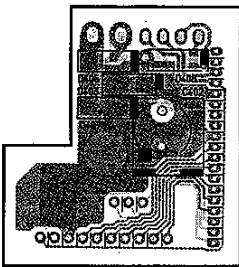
Power Supply Section-Dip Side View
